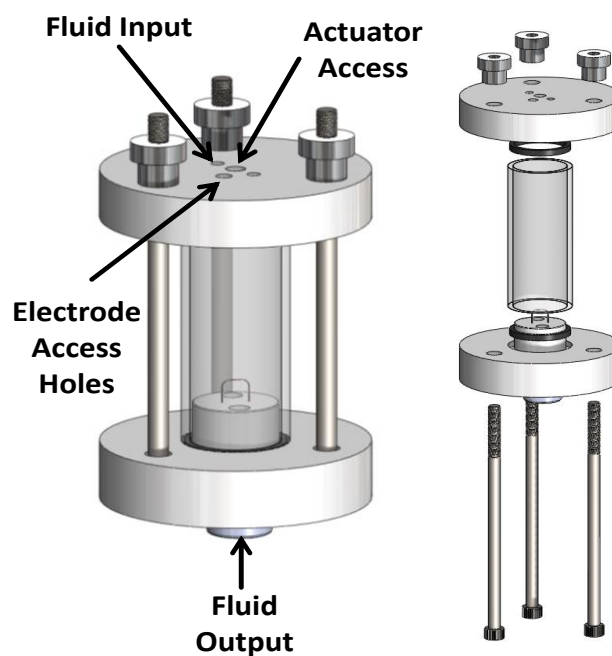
Custom test cell design with a glass tube capped with Delrin pucks and sealed with rubber O-rings and held with bolts and nuts.
